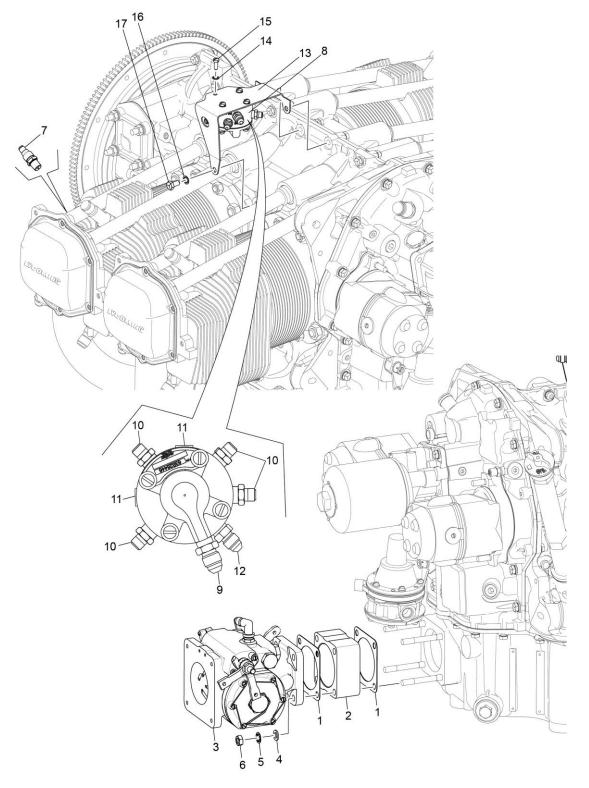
Fuel Injector, Fuel Manifold and Injection Nozzles
